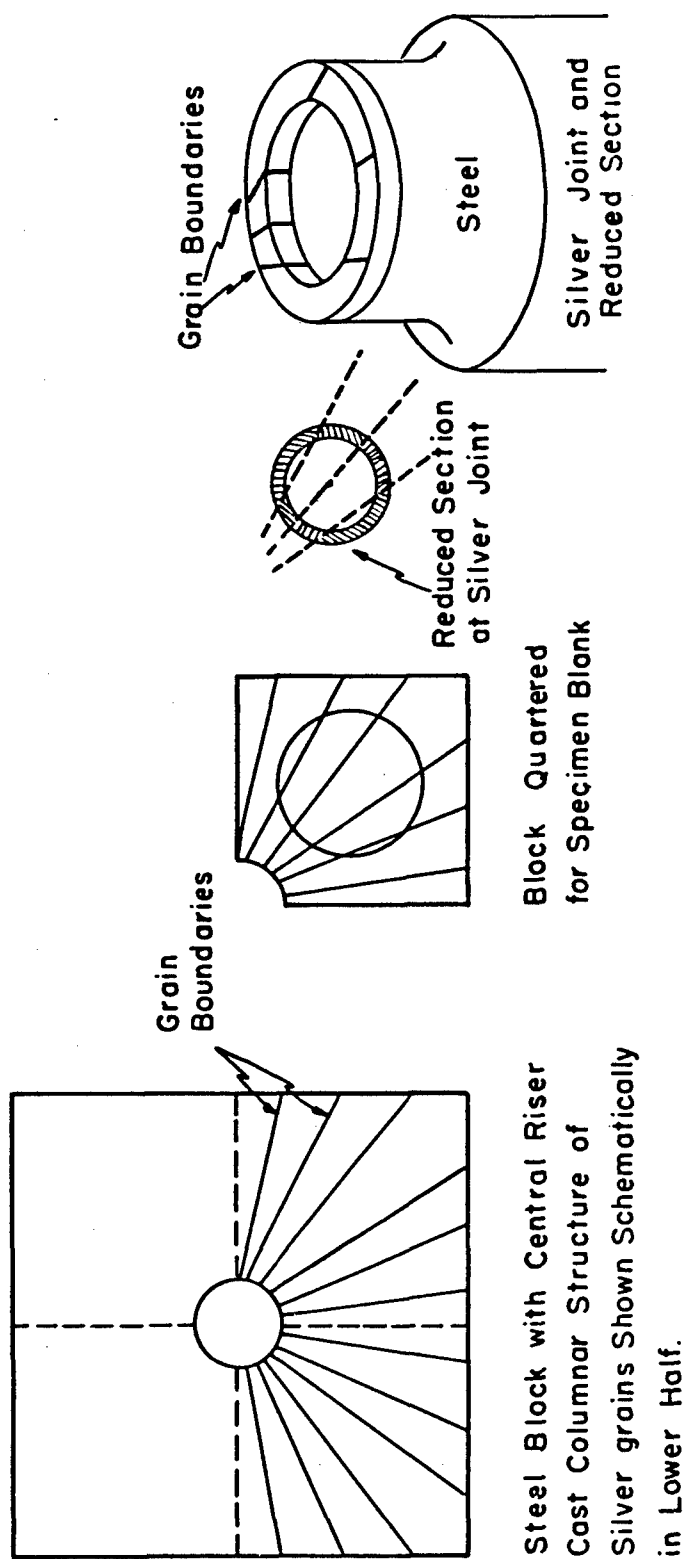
Preparation of a Silver Brazed Joint Torsion Specimen
